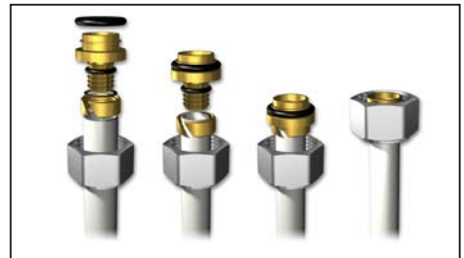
LK Coupling ext. thread installed on LK Under Floor Heating Pipe.
